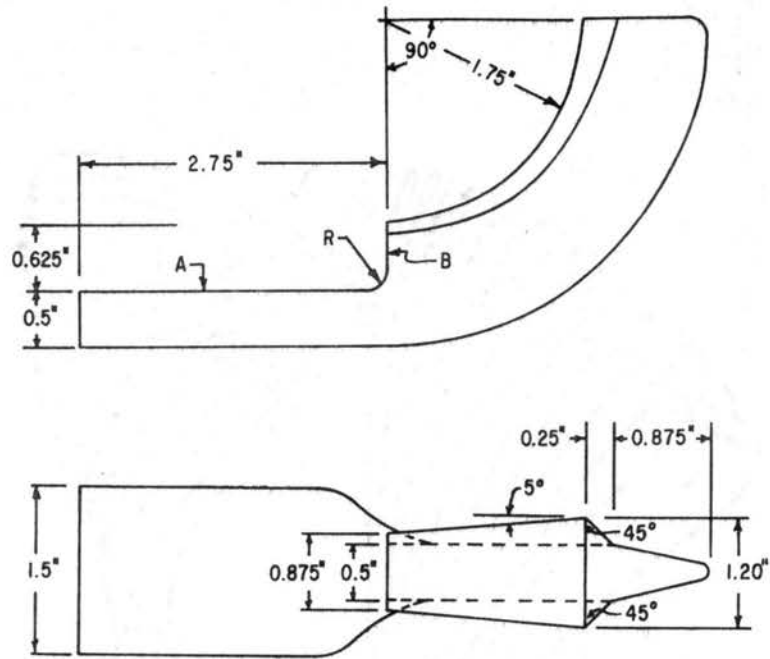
Dimensioned Drawing of the Guard-Ledger Assembly
